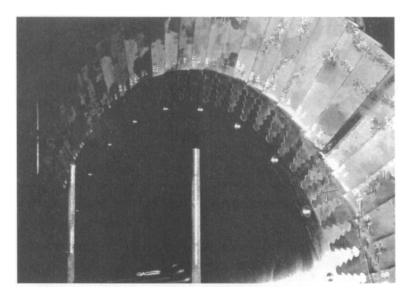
Rotor disk shown from the exhaust end. Blade trailing edges are coated with chromium carbide.
